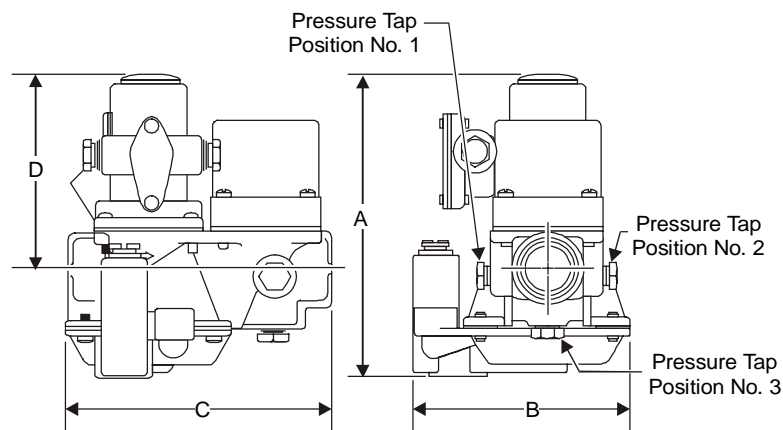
Lever-acting Regulator Model Dimensions Showing Optional Pressure Tap Positions
